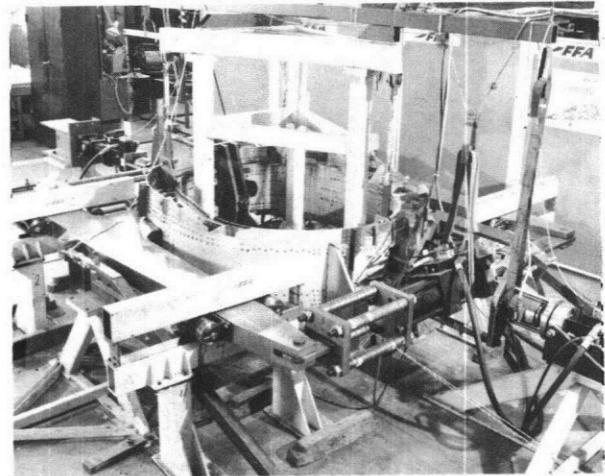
Test set-up for fatigue testing of an isolated main wing attachment frame assemblage
